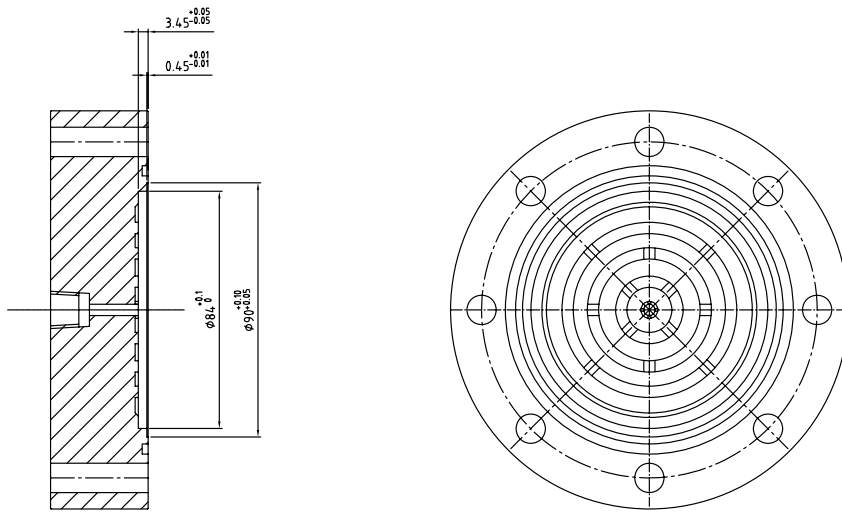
Details of the concentric flow grooves in the top and bottom end-pieces of the sample holder.
